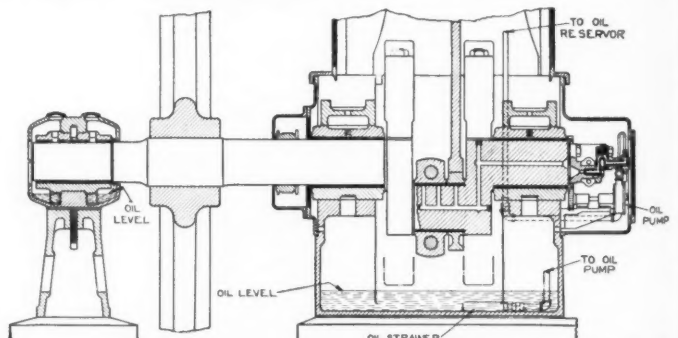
Section through the crankshaft and main bearings of a Sullivan angle compound compressor. The main oil reservoir is located in the bottom of the main frame, a rotary pump driven from the crankshaft delivering oil to all bearing surfaces. Part of this oil is forced under pressure to the crank pin, the remainder is delivered to an auxiliary reservoir in the top of the vertical frame, from whence oil flows by gravity to all essential parts.
